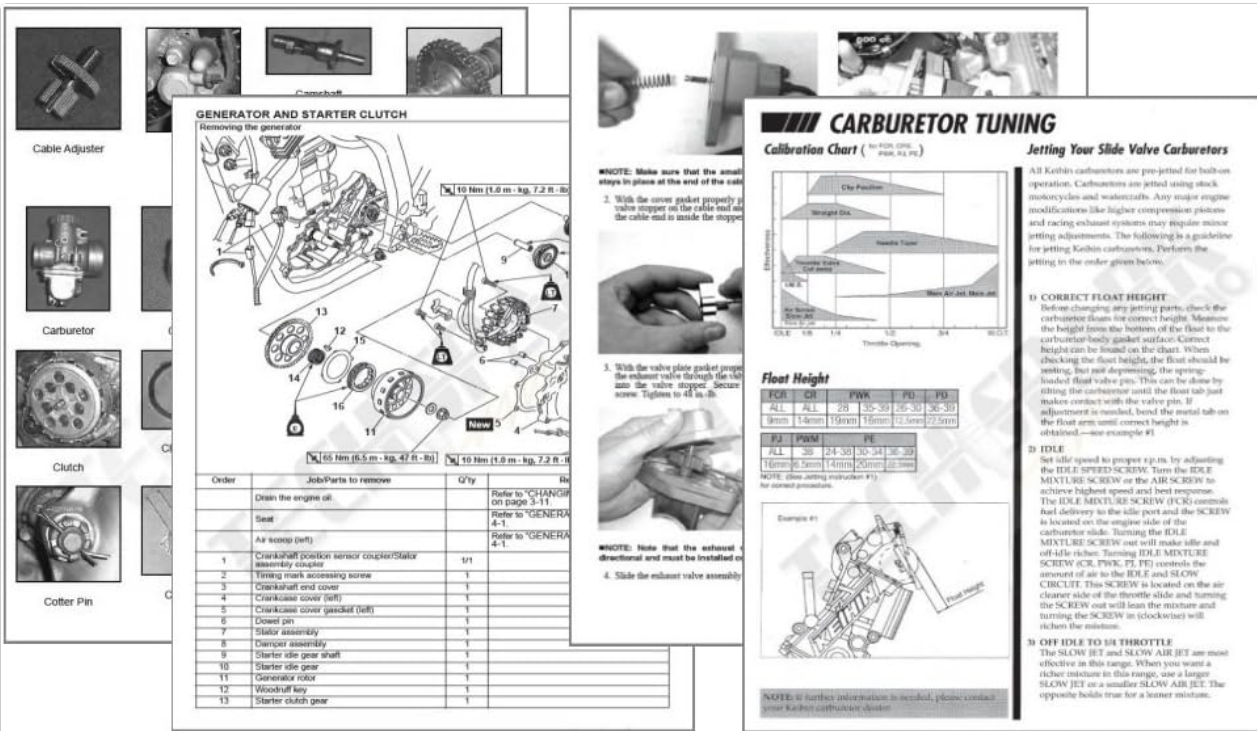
Examples of detailed technical content from the manual, including exploded views of components, carburetor tuning charts, and parts lists.
